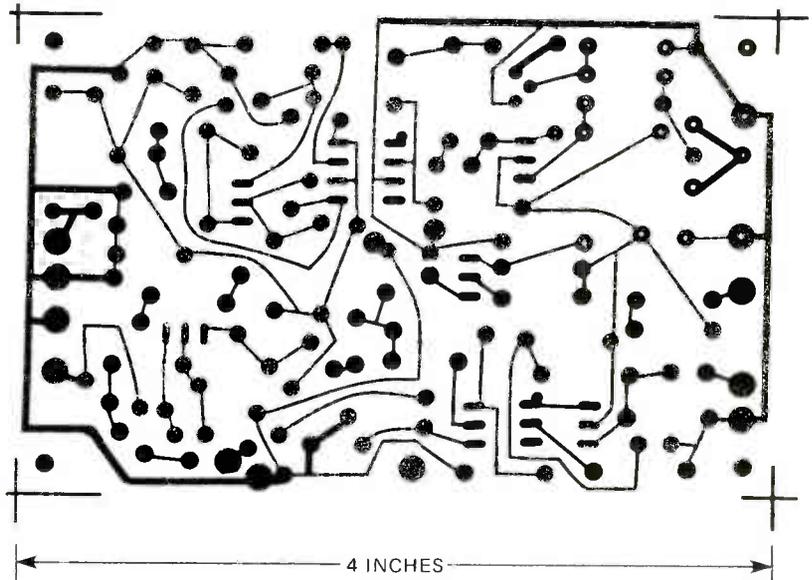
SINGLE-SIDED PC BOARD is small enough to fit comfortably inside most TV sets.
